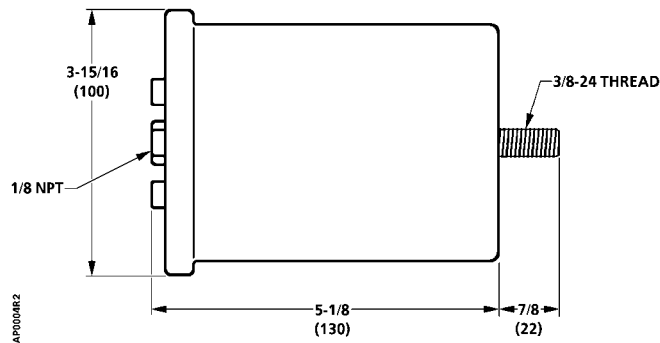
No. 3 Pneumatic Damper Actuator Dimensions. Dimensions are in Inches (Millimeters).
